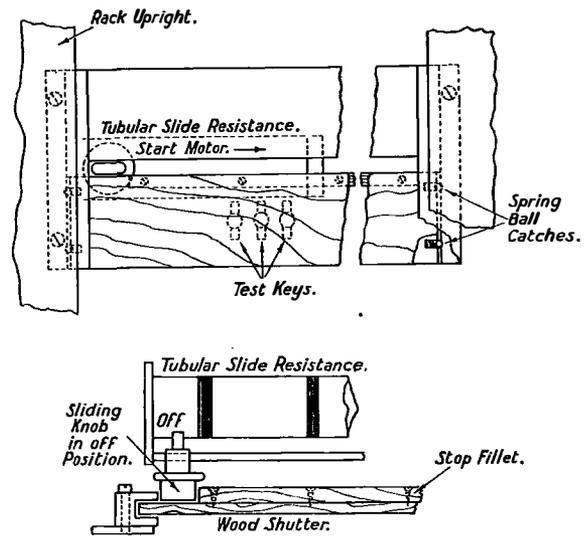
DETAIL OF SLIDING SHUTTER ON THE MEGGER PANEL.
